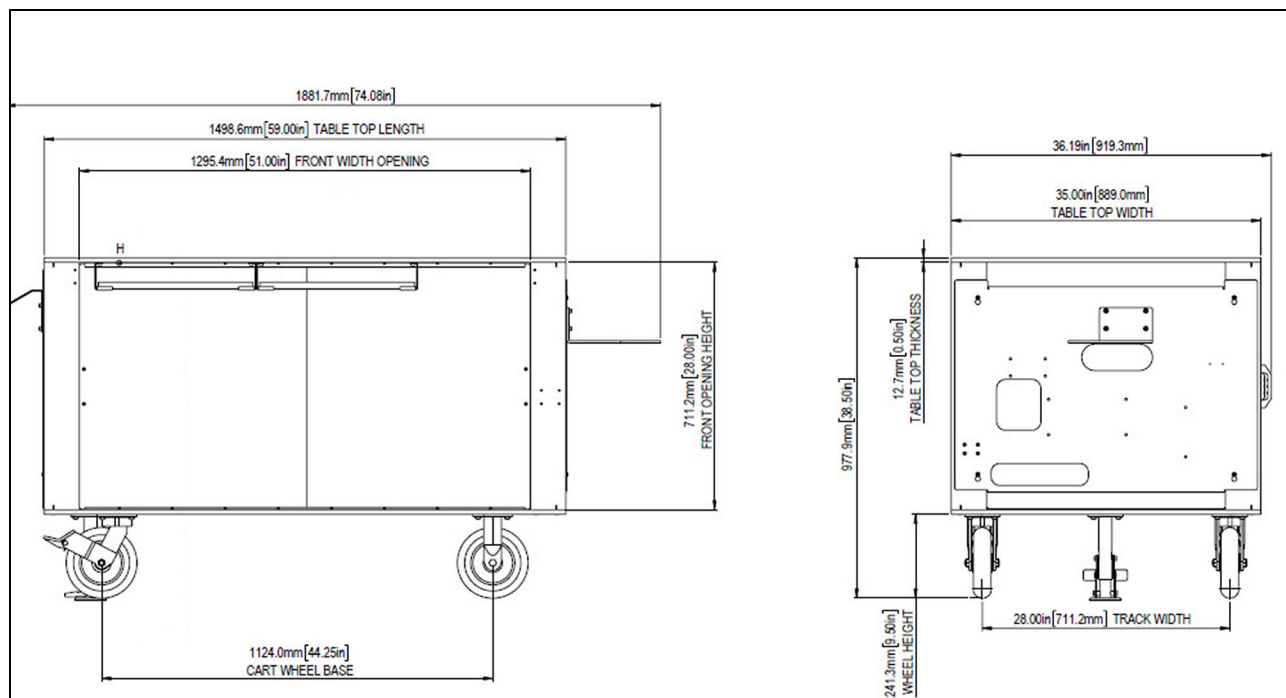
Gen. II Universal Cart for CRX-10iA/L
